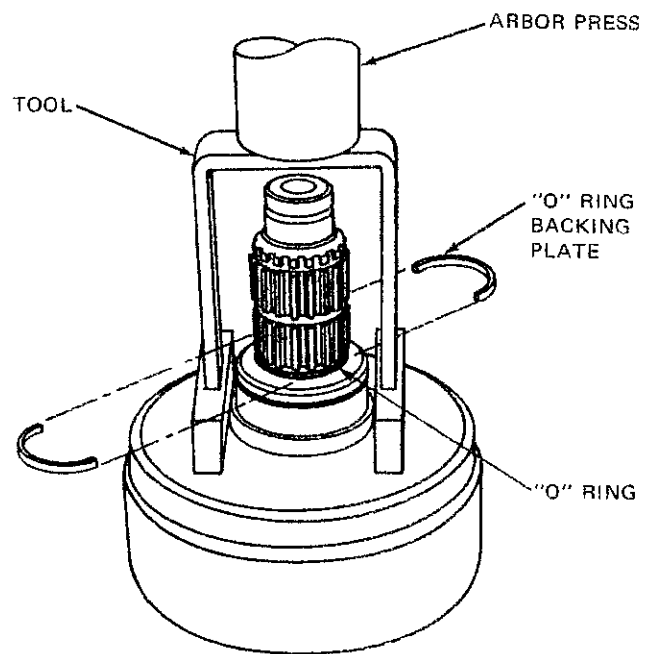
ASSEMBLE "O" RING AND BACKING PLATES
